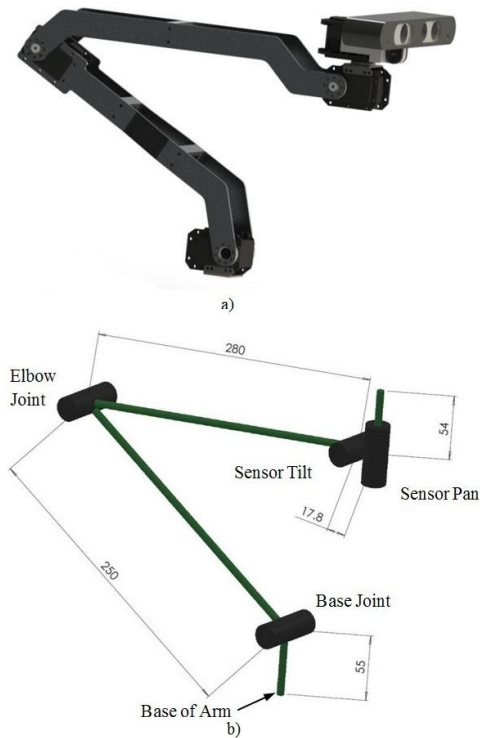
a) CAD rendering of the sensor arm b) Skeletal view of the sensor arm with dimensions
